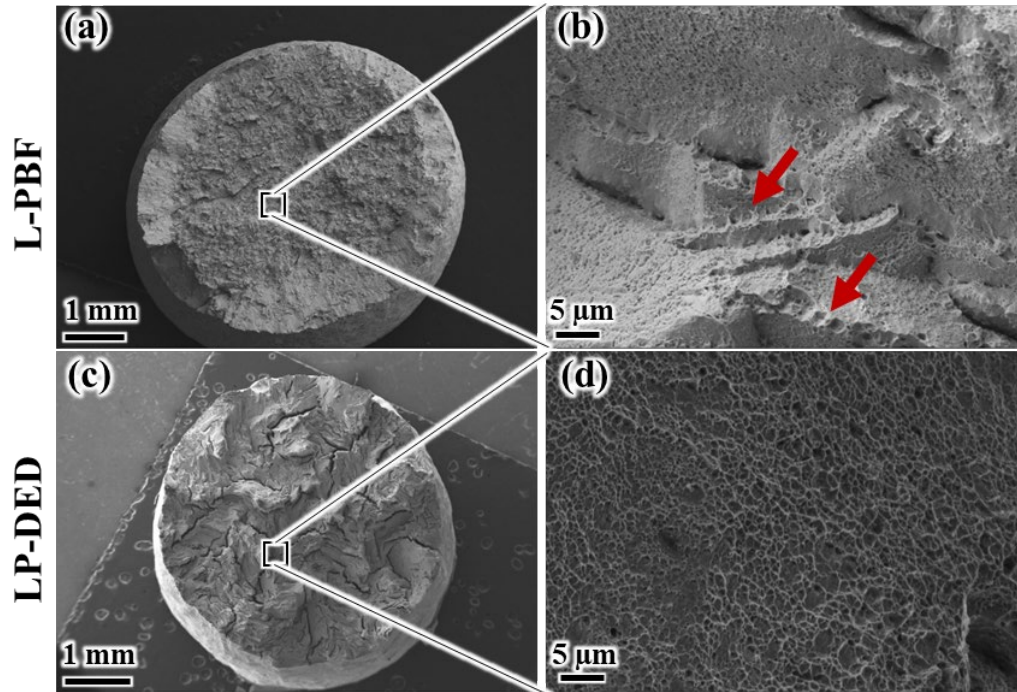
Tensile fracture surfaces of (a)-(b) L-PBF and (c)-(d) LP-DED specimens. The red arrow indicates the fractured particles inside the dimples.
